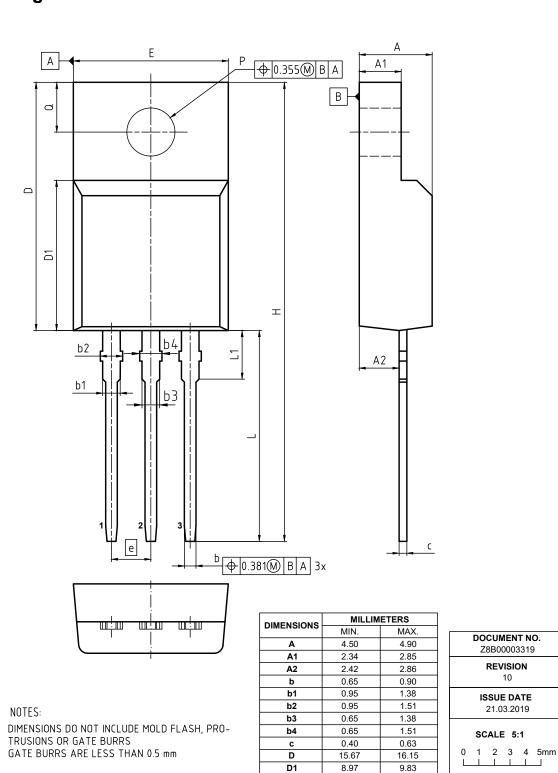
Outline PG-TO 220 FullPAK, dimensions in mm
